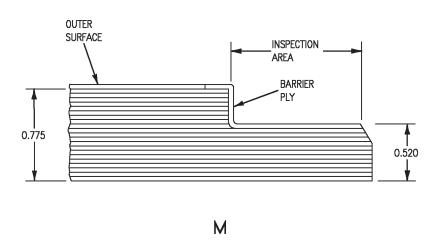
Inner Wing Upper Surface Solid Composite Laminate and Door Sill Inspection Areas (Sheet 6)
